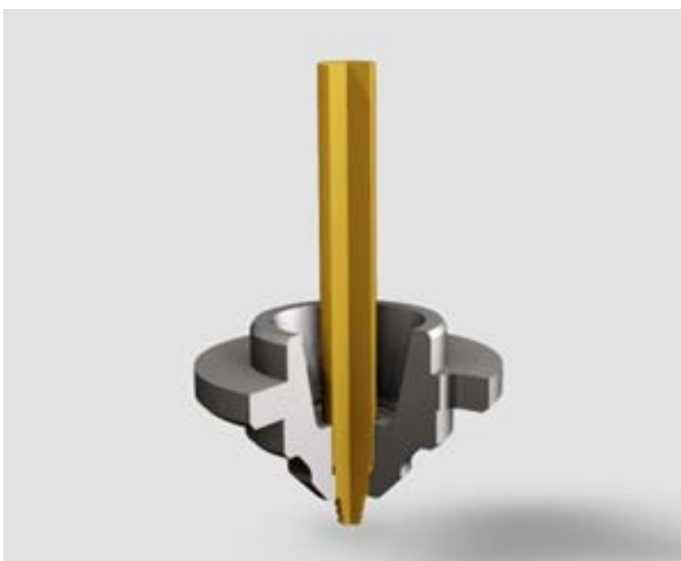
Example of a simplified welding pin and shoulder geometry for tool with stationary shoulder (SSFSW tool)
